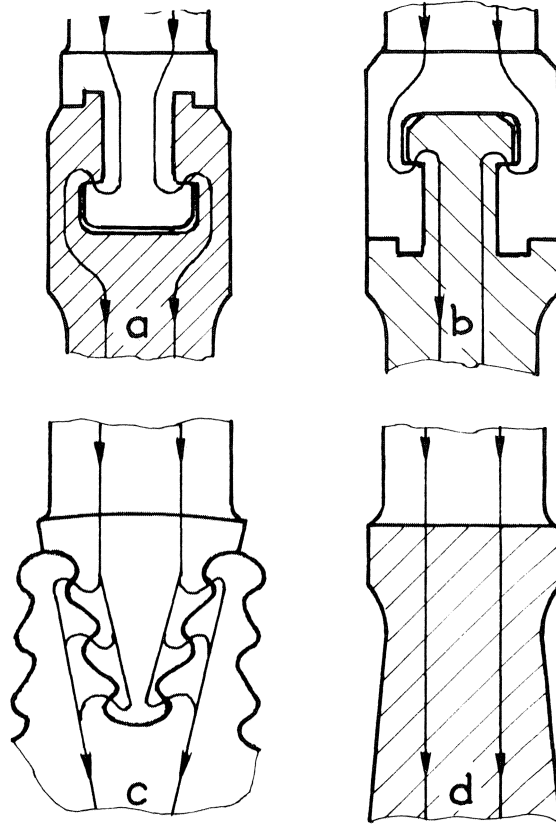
Load Transfer for Various Roots. a) Circumferential Internal Groove, b) Straddled Root [3]. c) Axial Sawtooth Root, and d) Blade Integral With Rotor [7].
